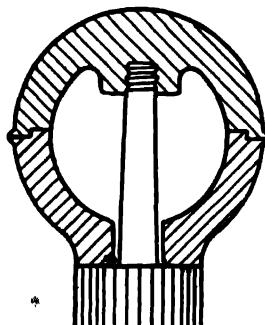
Cross section of a ball molded in two parts to eliminate heavy sections.
